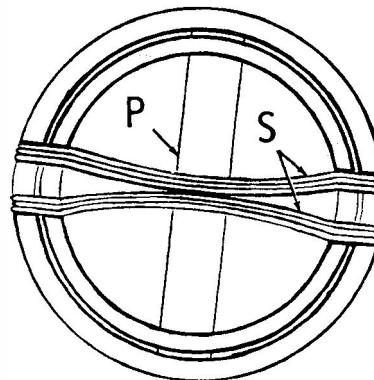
A—Schematic end view of steering control sleeve and spool showing correct assembly of centering springs (S) and drive pin (P).
